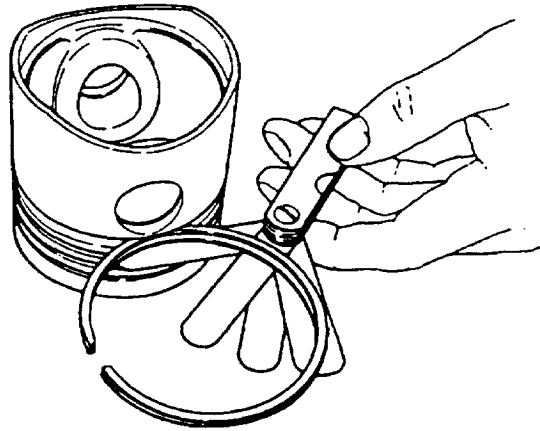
Measuring the clearance between the piston ring and groove (Side clearance)
